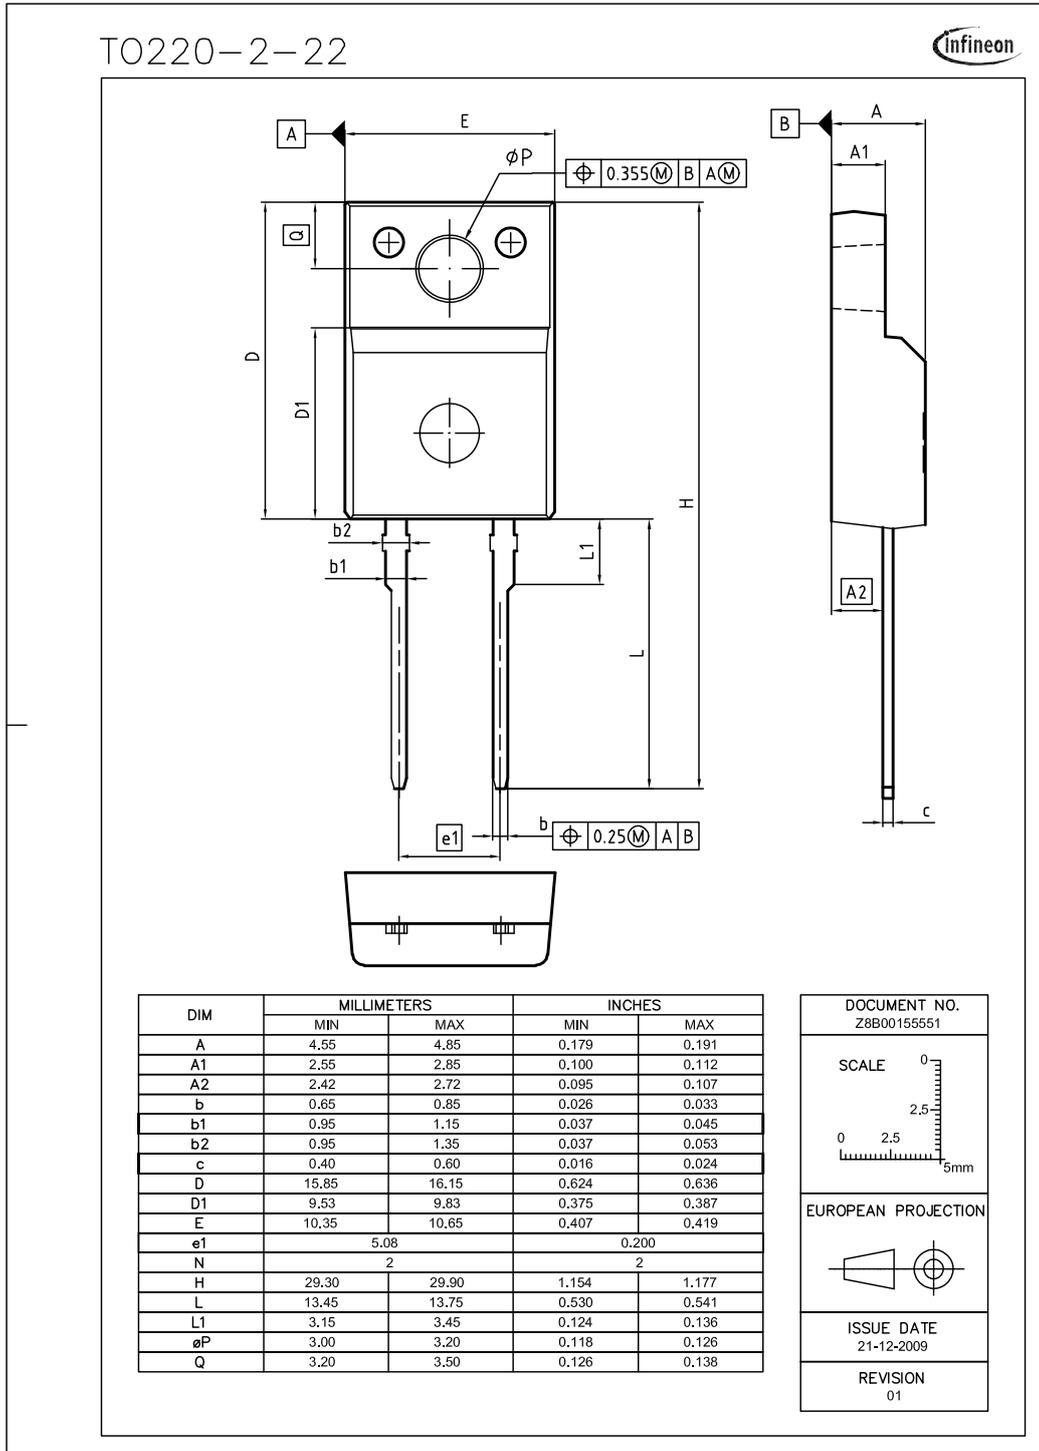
Outlines TO-220 FullPAK, dimensions in mm/inches
